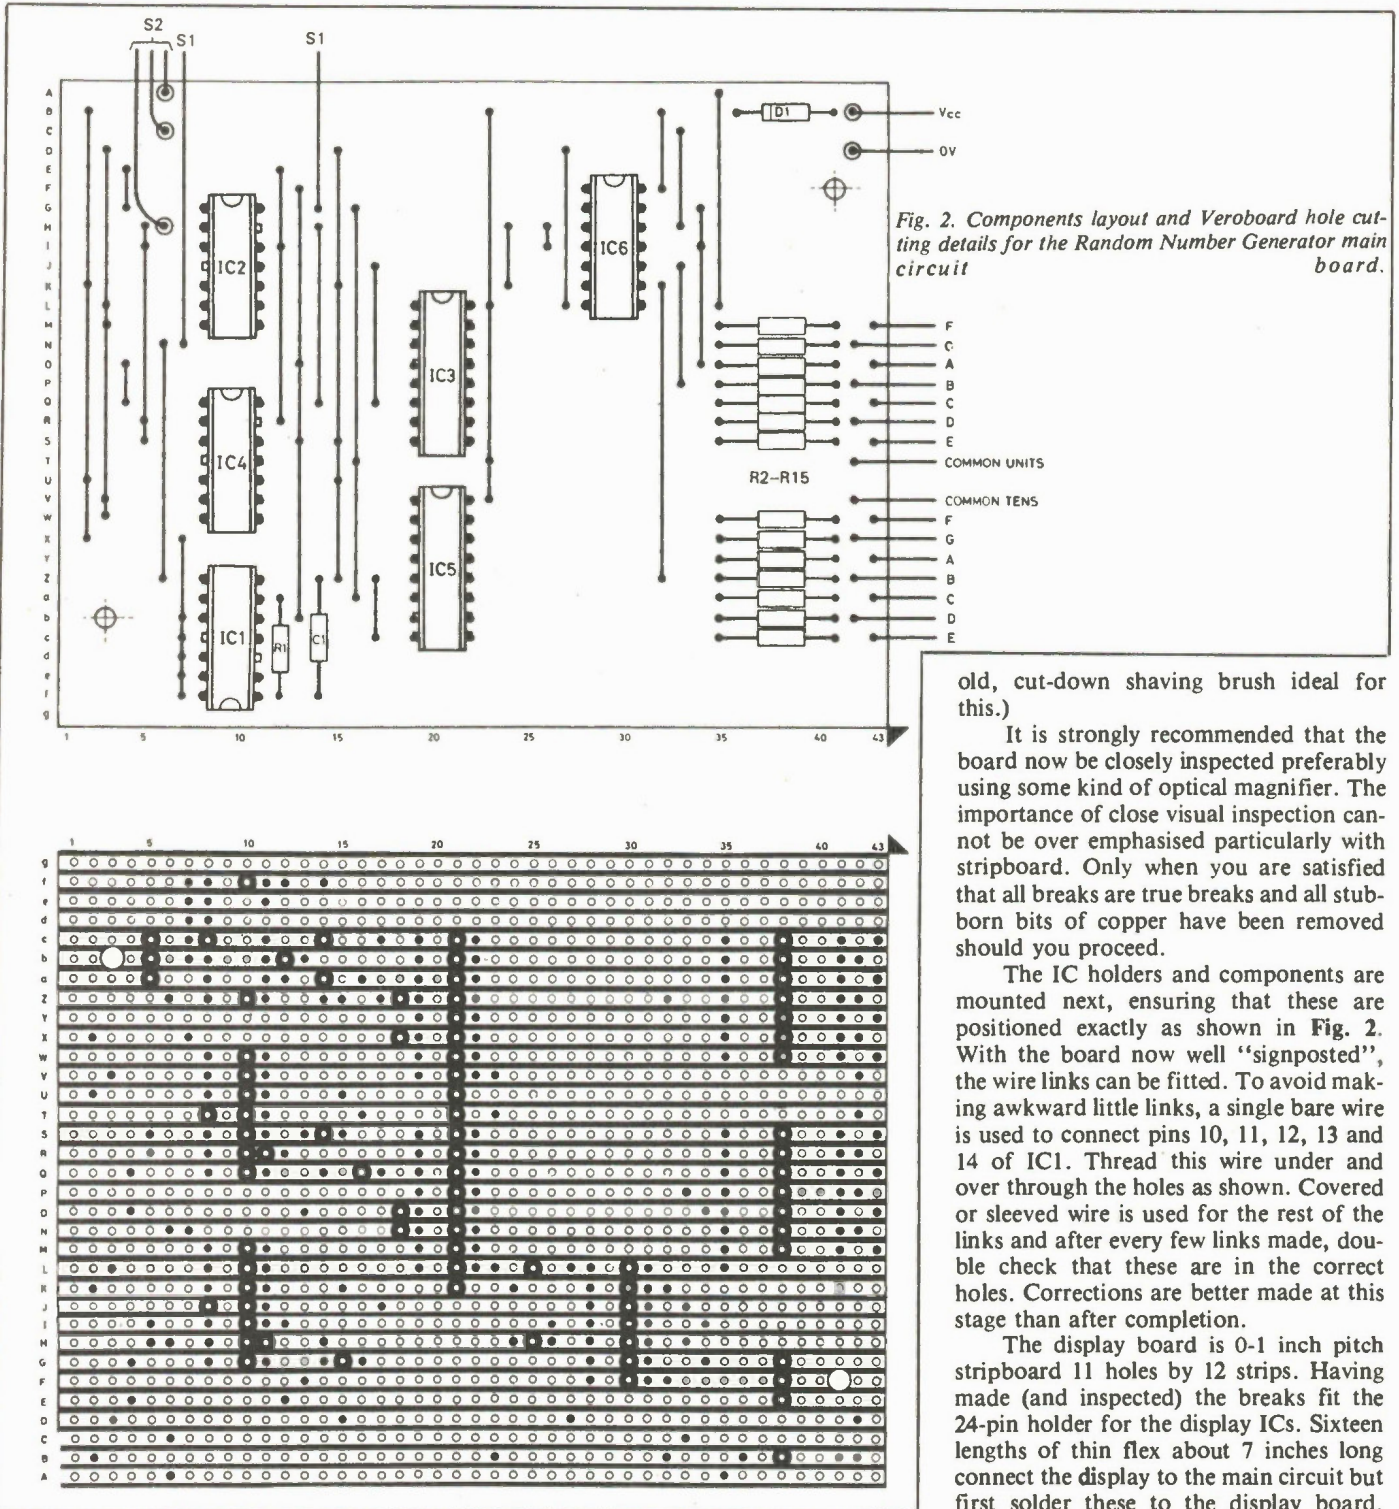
Components layout and Veroboard hole-cutting details for the Random Number Generator main circuit.
